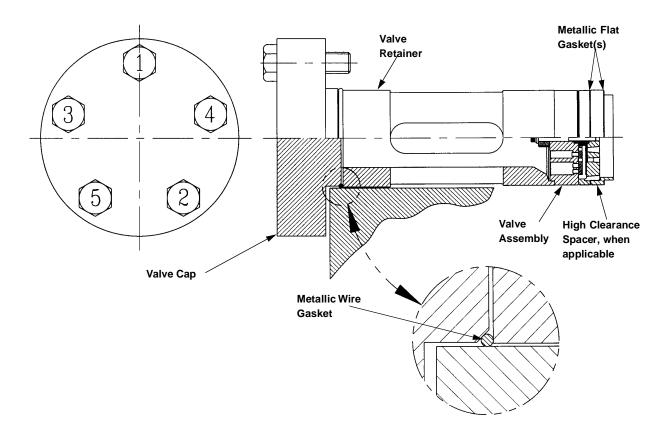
HIGH PRESSURE VALVE CAP ASSEMBLY
